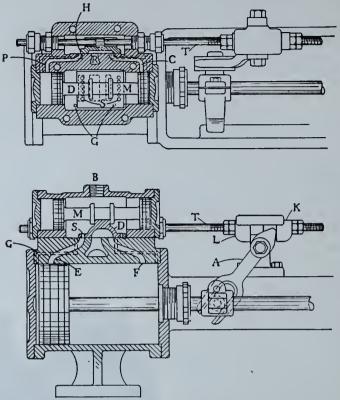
SECTIONAL VIEW OF STEAM END SHOWING CYLINDER CHEST AND VALVES.
